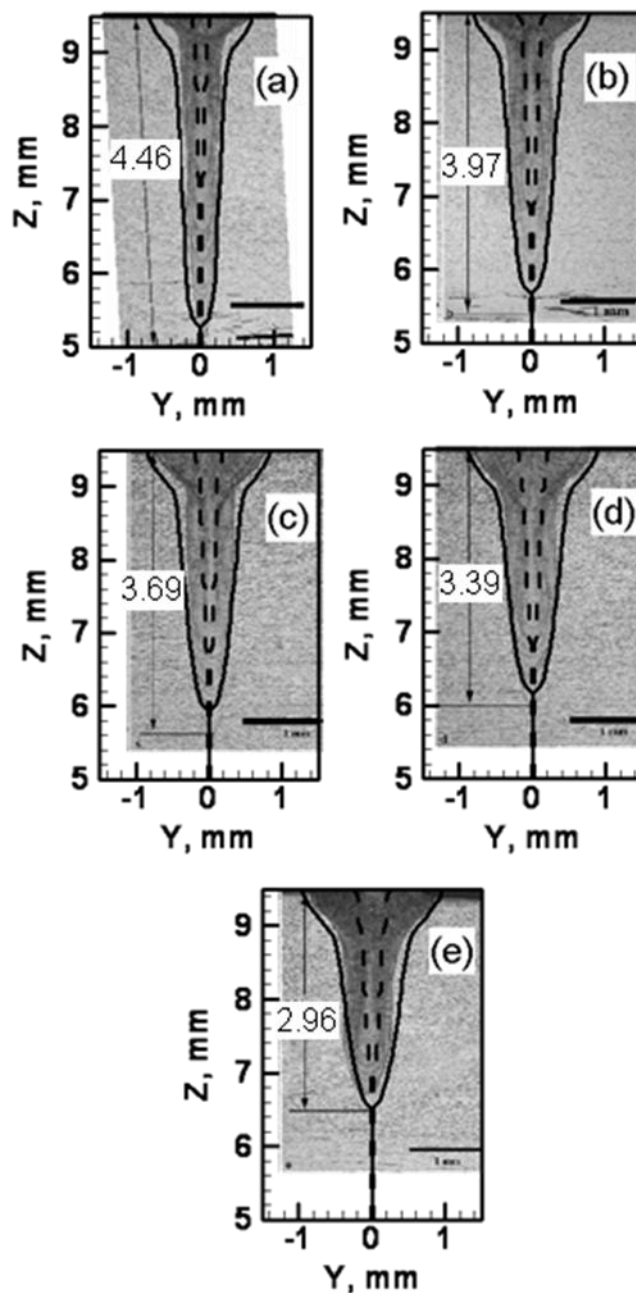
Comparison of experimental and calculated weld geometries for 304 L stainless steel welds made with focal spot radii a) 0.131 mm, b) 0.173 mm, c) 0.207 mm, d) 0.243 mm, and e) 0.279 mm. Input power: 1000 W. Welding speed 17 mm/s. Weld penetration is in mm.
